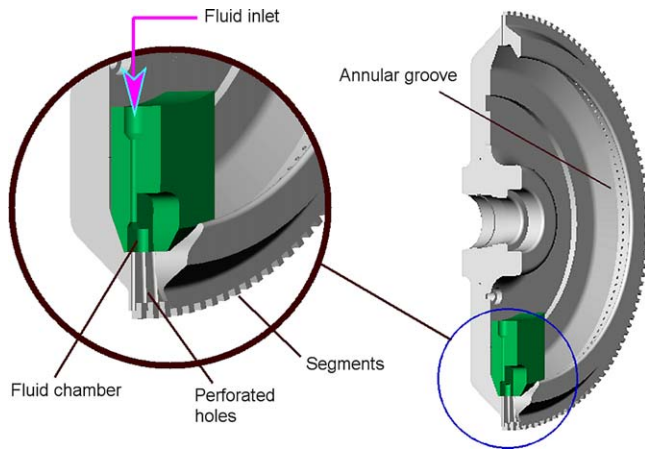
Section view of the segmented wheel/fluid chamber system.
